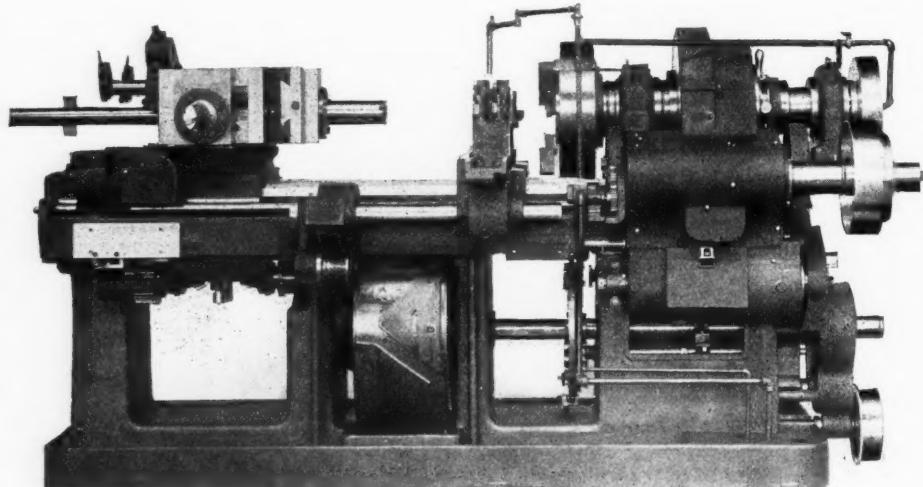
Rear View of the "Long Travel" Automatic Chucking Machine.
